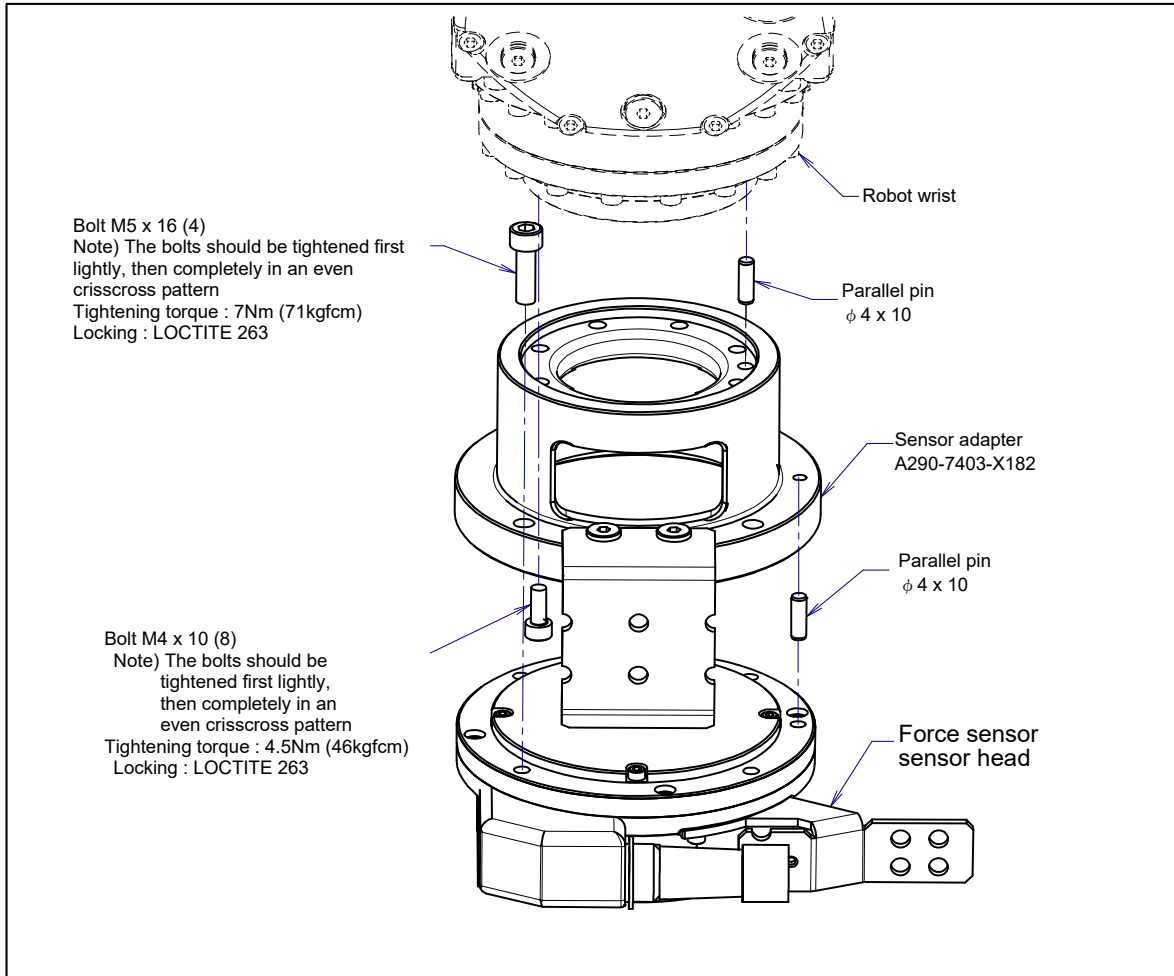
(b) Replacing the force sensor, sensor head and adapter (M-10iA+FS-15iA)
